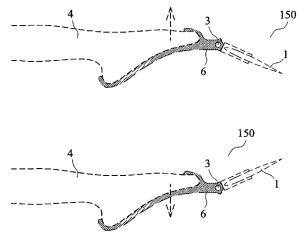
DRAWING OF OSCILLATING FOIL WITH JOINT [9]
